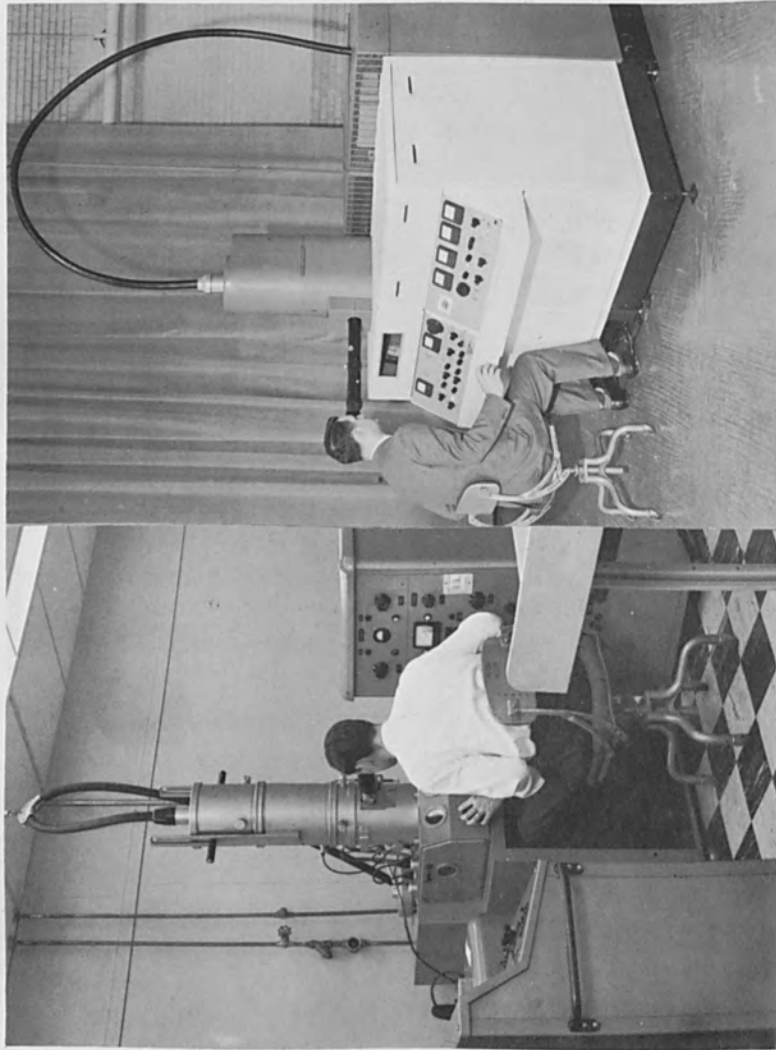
Hamilton-Zeiss Electron Beam Welder
